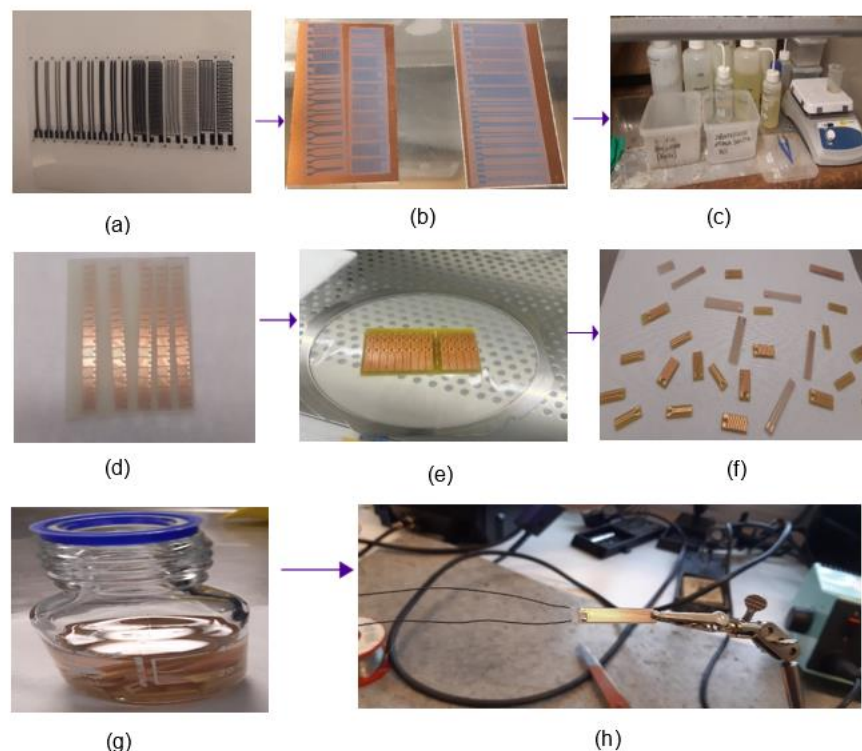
Fabrication process of interdigital fringe sensor, (a) Sensor printed mask, (b) Sensor mask placed on top of PCB for development, (c) Solution for developing the film, (d) Developed sensor (e) Sensor prepared for laser cutting (f) Sensor's in different shapes (g) Placed in a bottle for cleaning with Isopropanol (h) Sensors are soldered.
